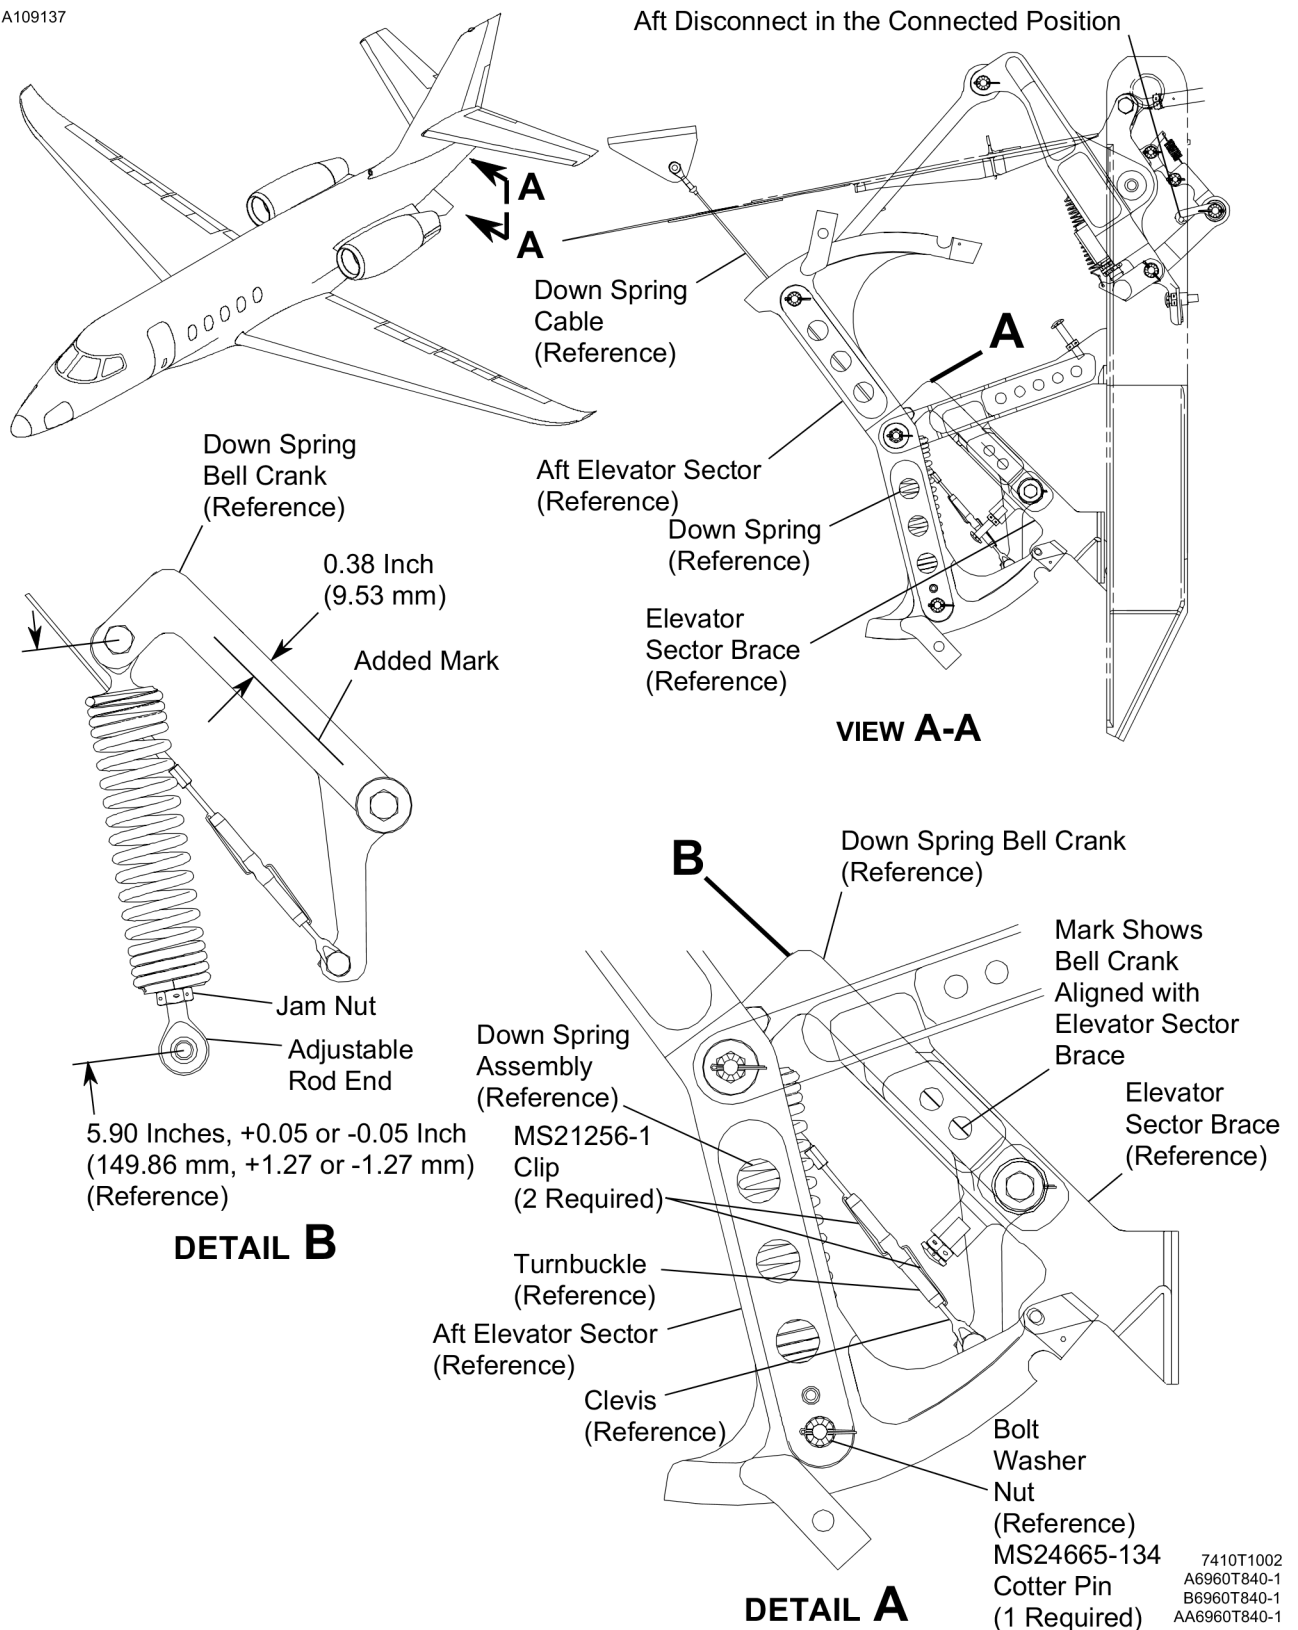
Inspection of the Aft Elevator Sector Bolt for Correct Installation (Sheet 2)
